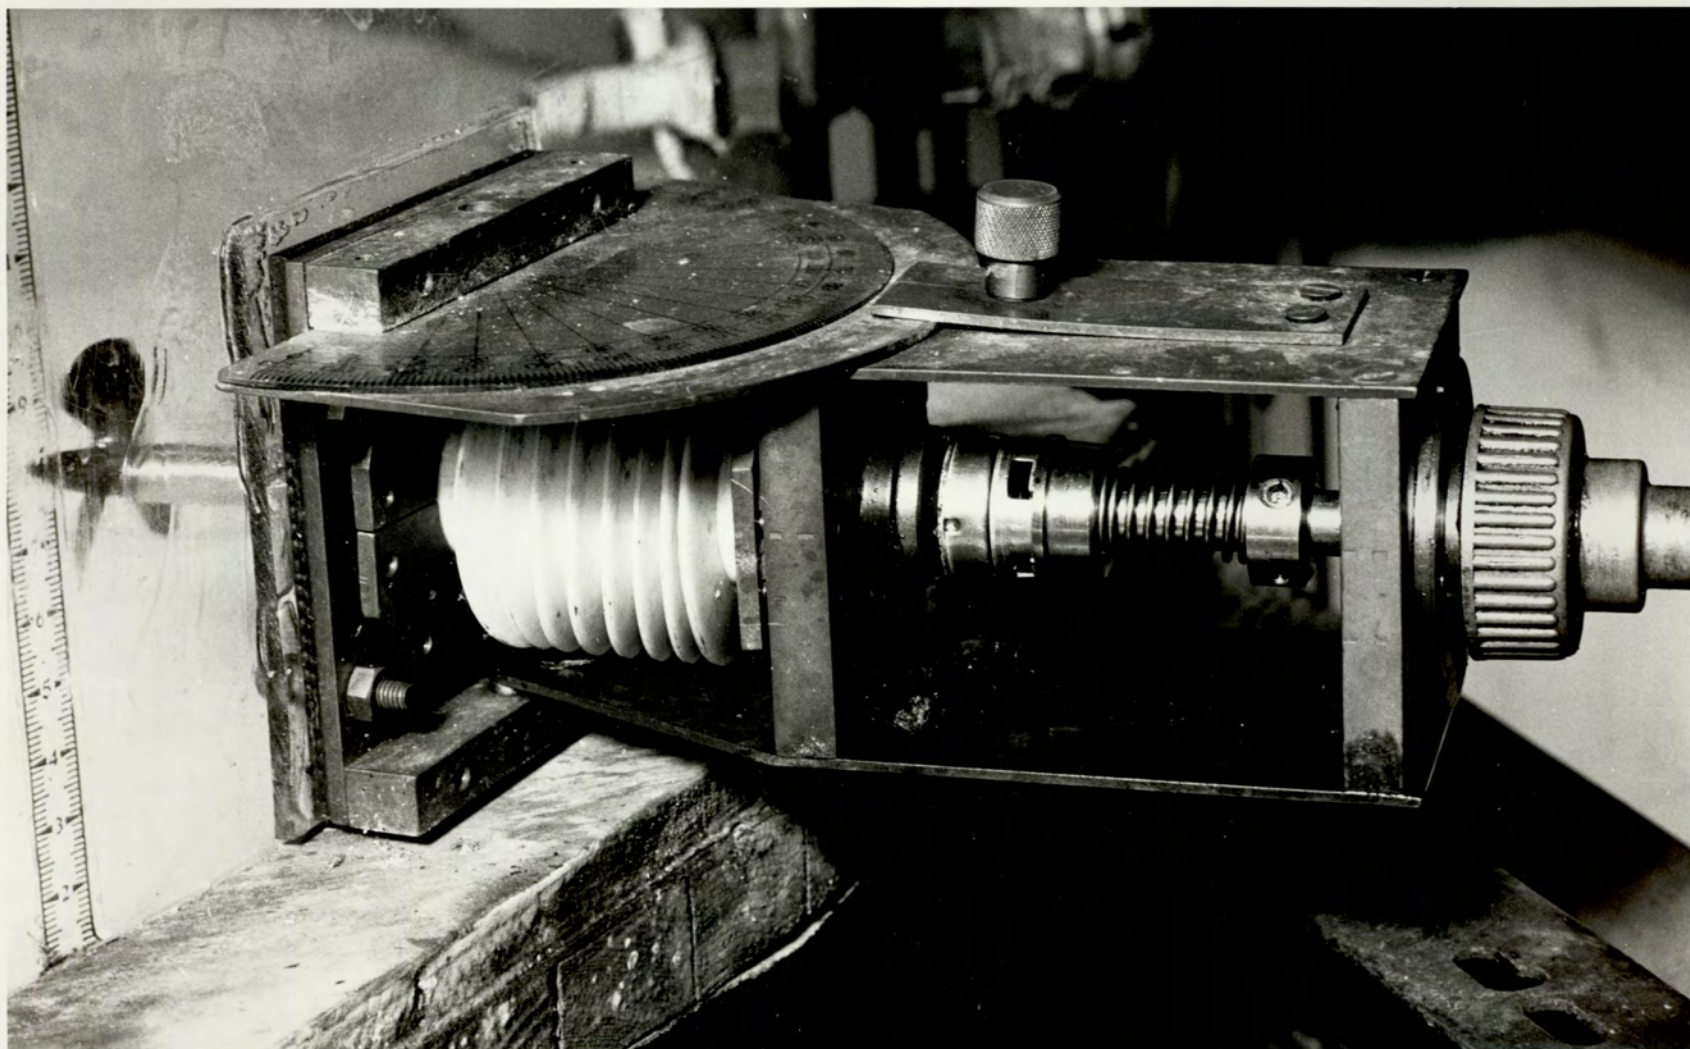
IMPELLER SHAFT SEAL
